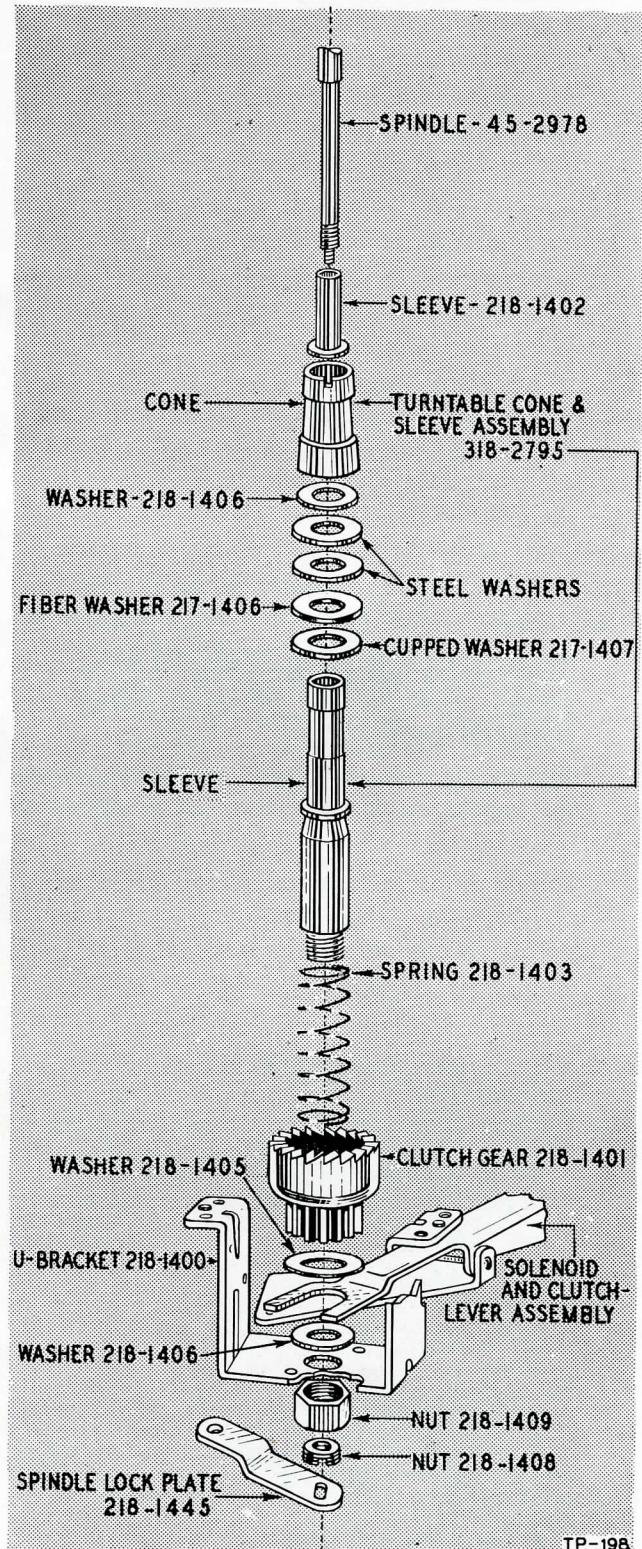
SPINDLE ASSEMBLY (EARLY TYPE)
